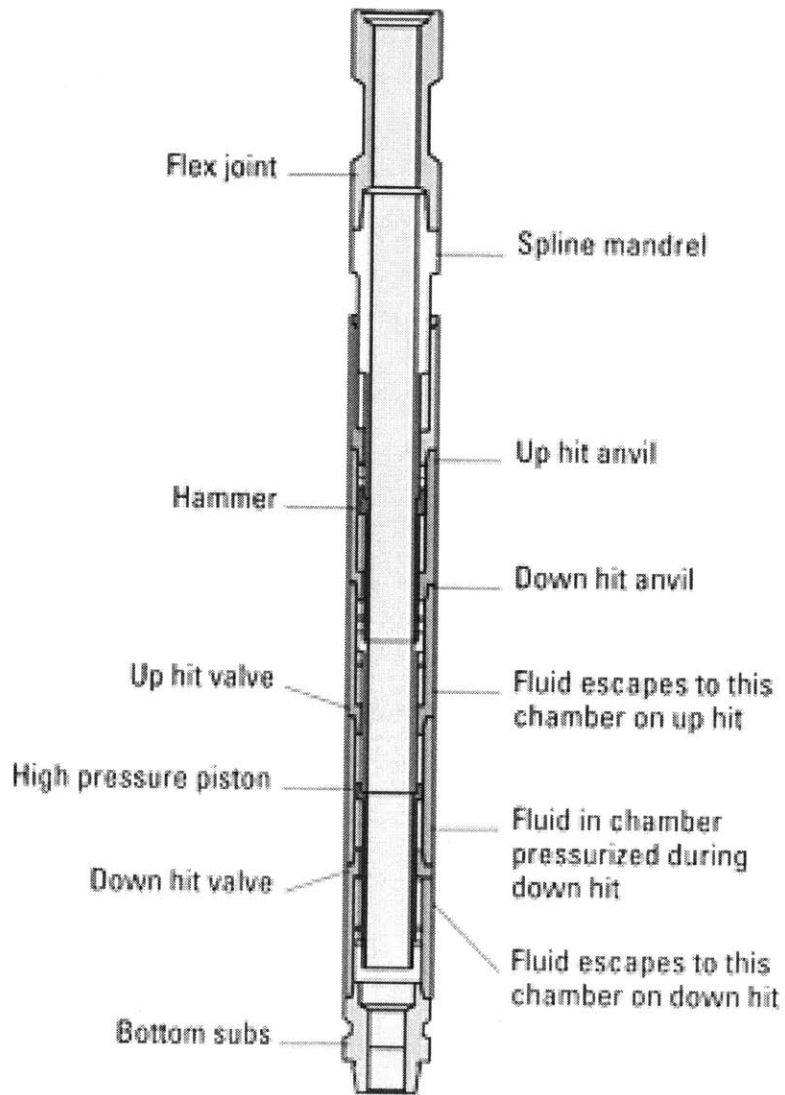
Jar. This hydraulic jar can be used to free stuck downhole equipment.
